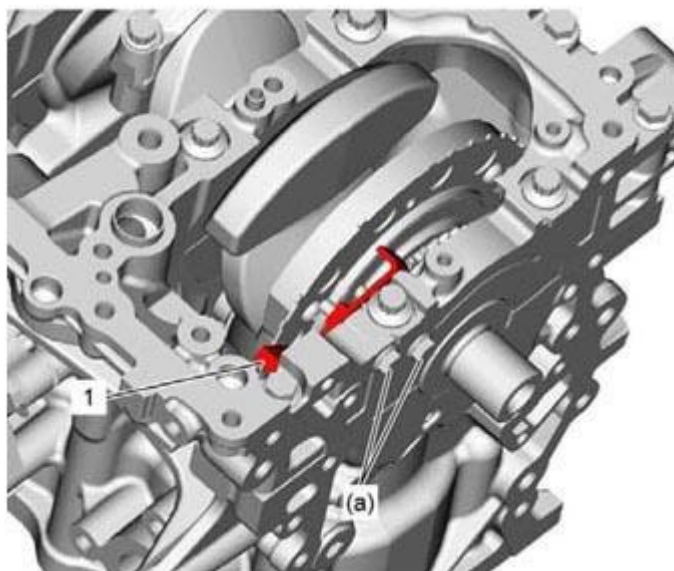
Installing Rear Oil Seal To Cylinder Block Using Special Tools
